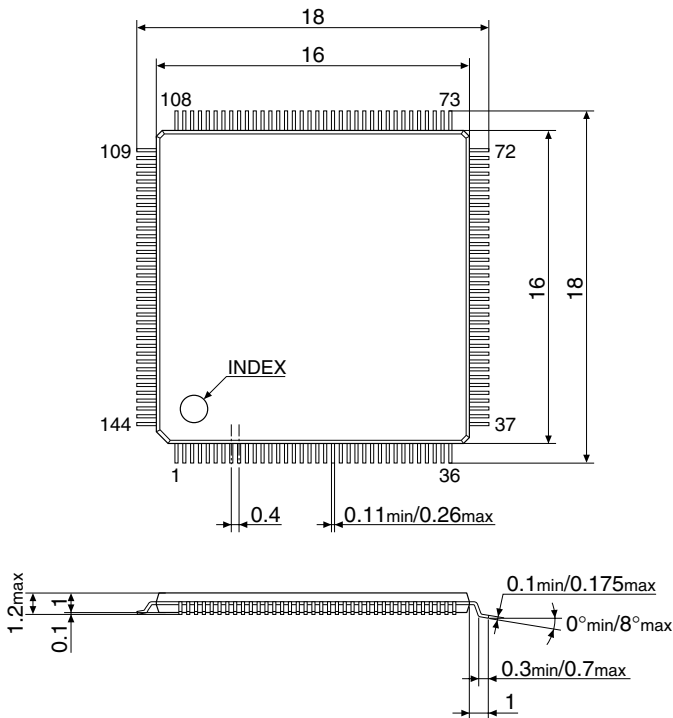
TQFP24-144pin Package Dimensions
